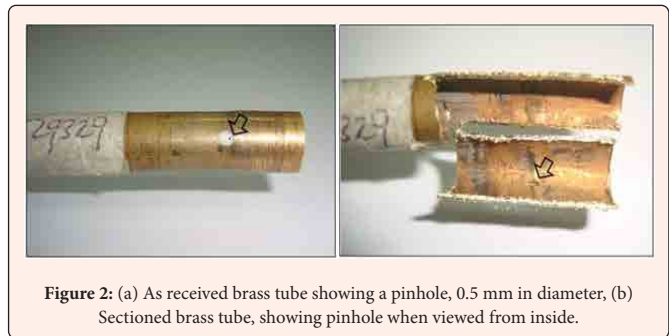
(a) As received brass tube showing a pinhole, 0.5 mm in diameter, (b) Sectioned brass tube, showing pinhole when viewed from inside.
